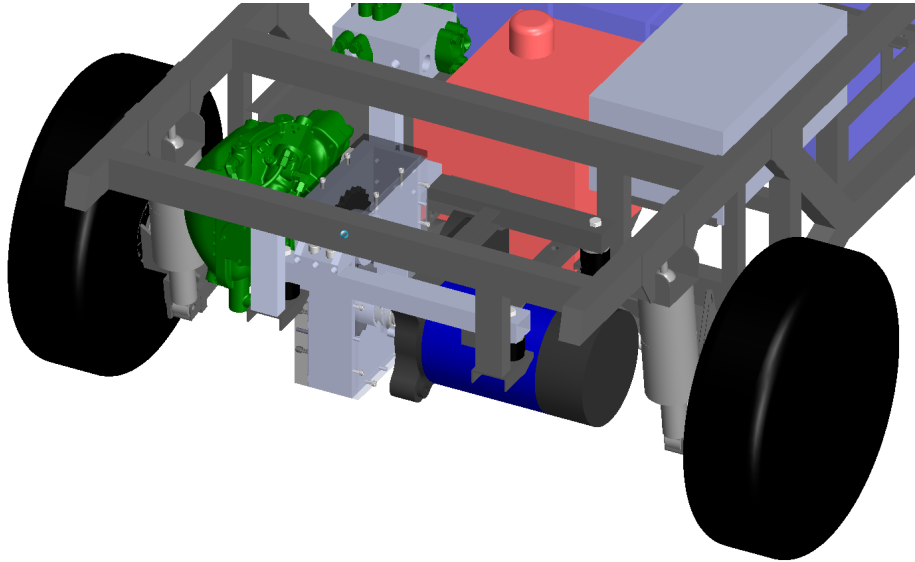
Represents the overall layout of our prototype design with the available workspace
